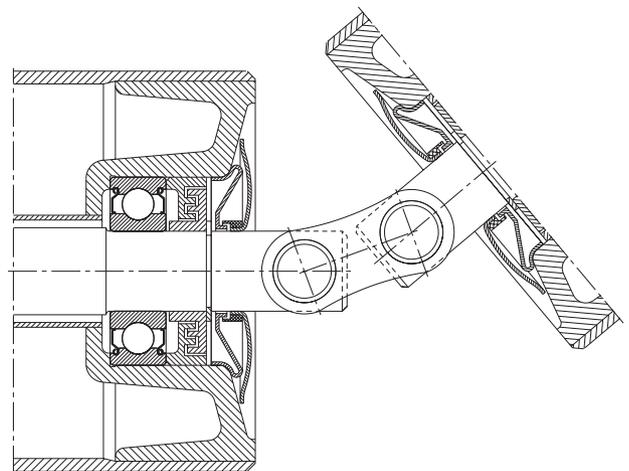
shows idler garlands connected by chain links. These idlers are part of a conveying installation for rock phosphate. The bearings fitted are deep groove ball bearings FAG 6303.2ZR.C3.
